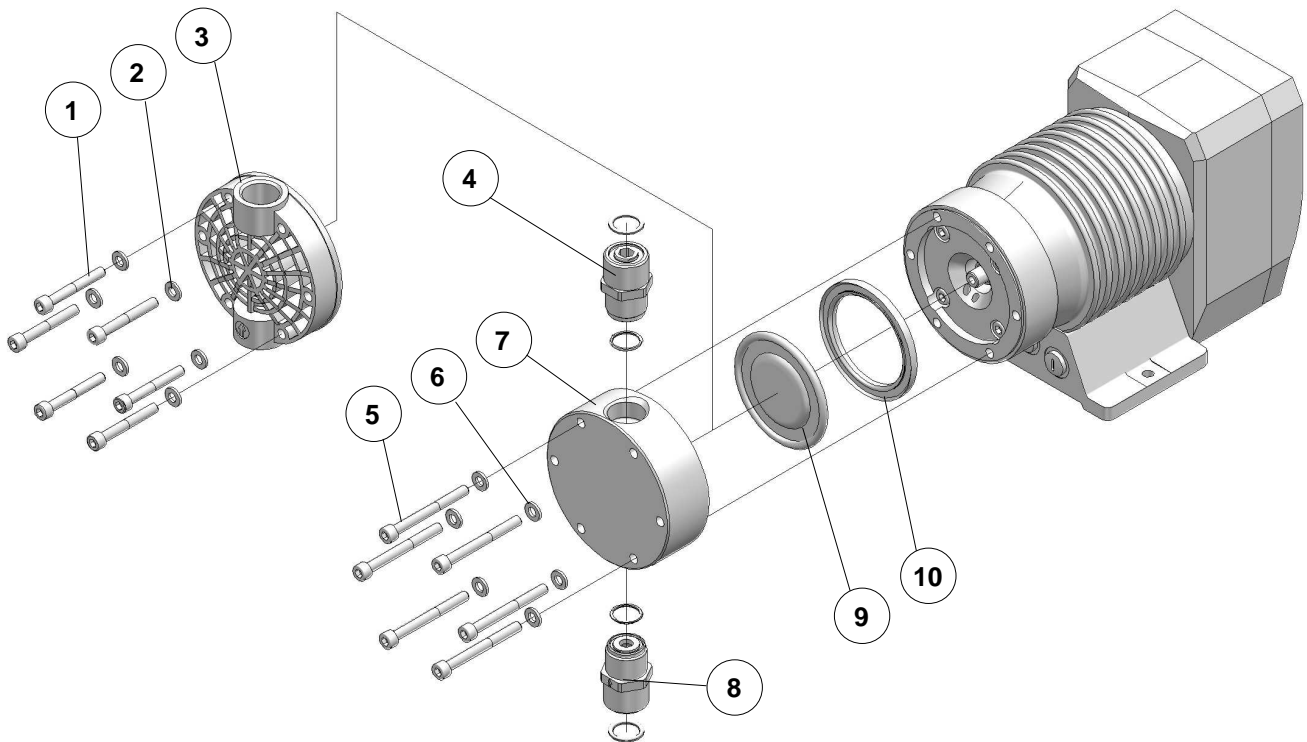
Spare- and wearing parts R 204.1-25e ....-35e
